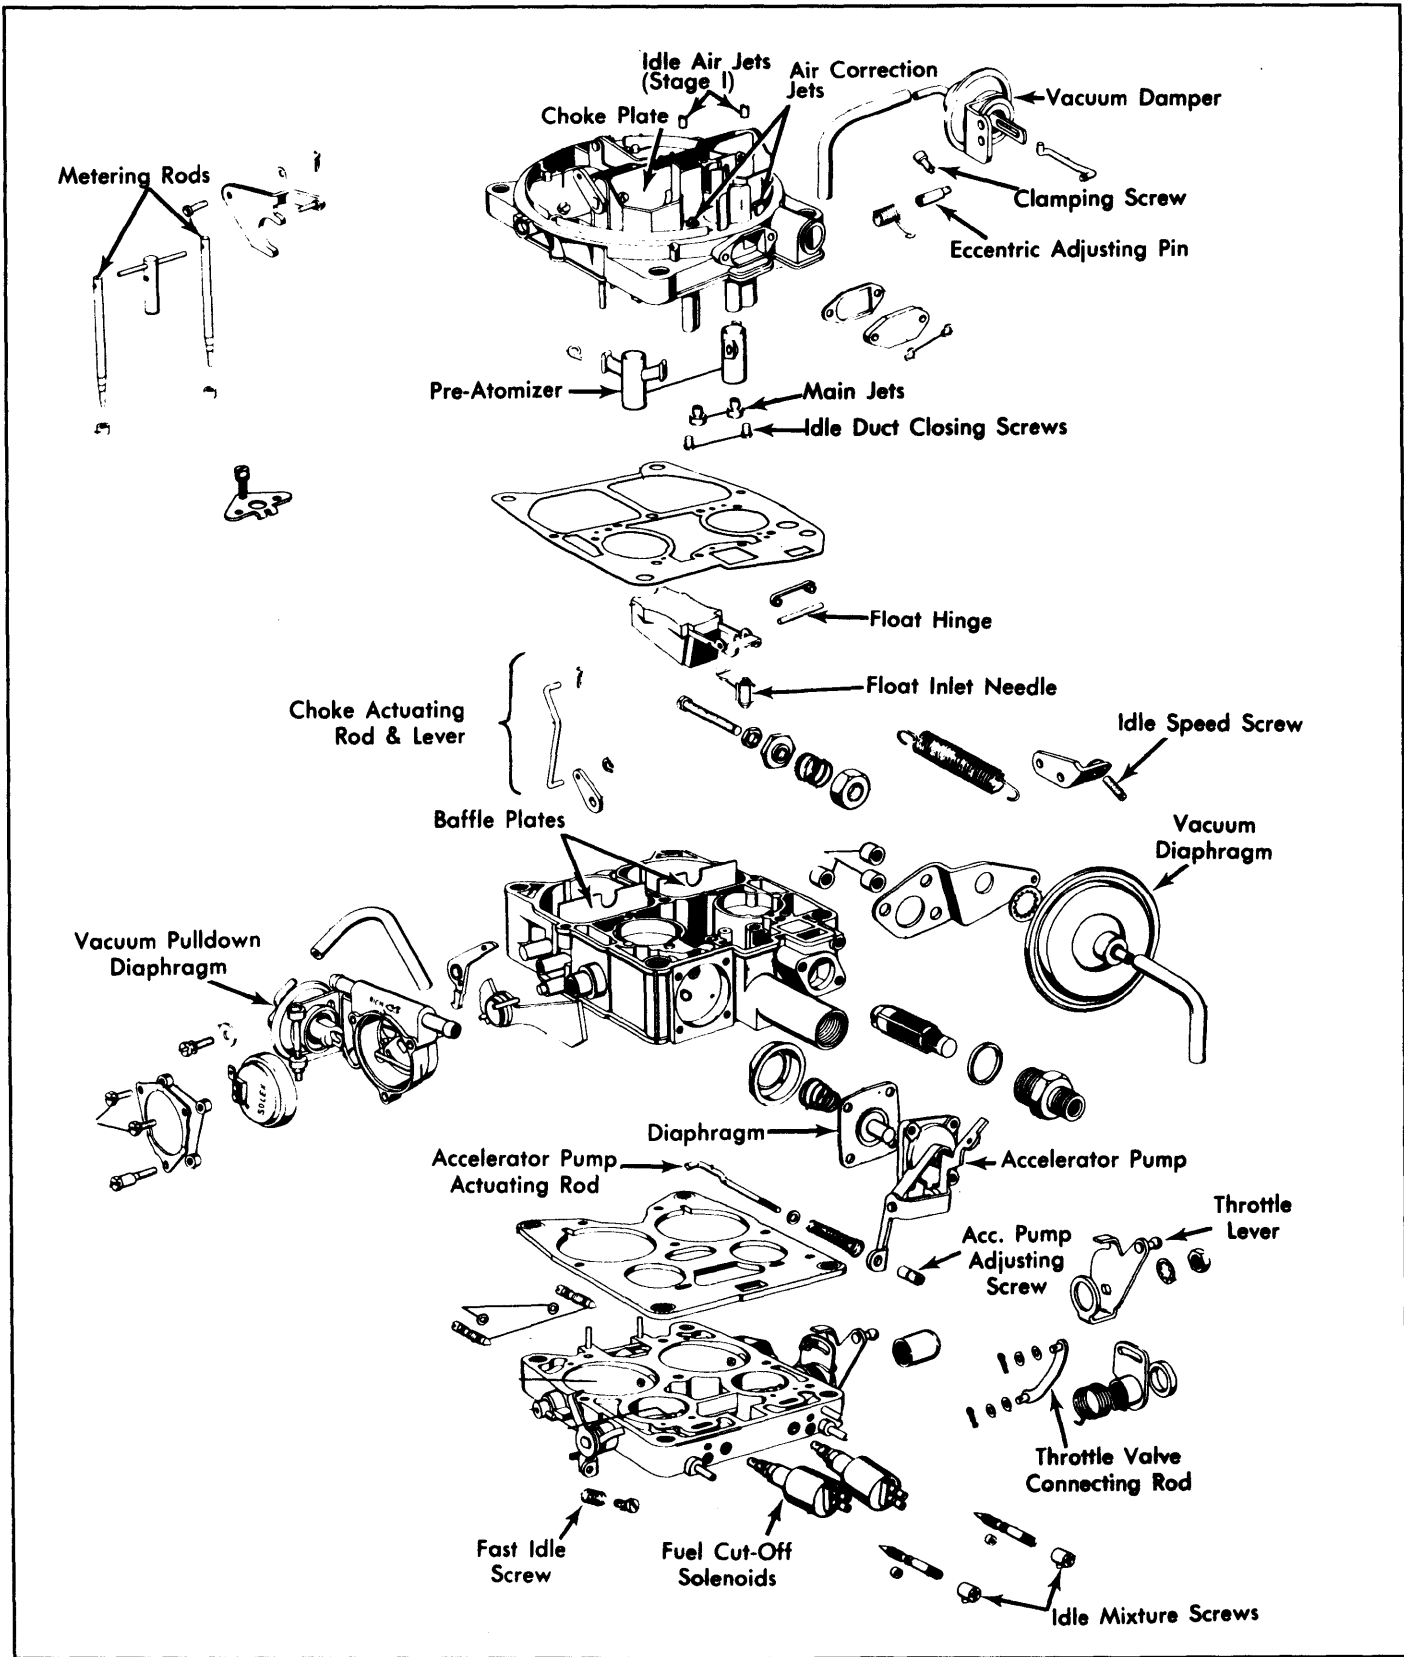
Exploded View of Solex 4A1 4-Barrel Carburetor
